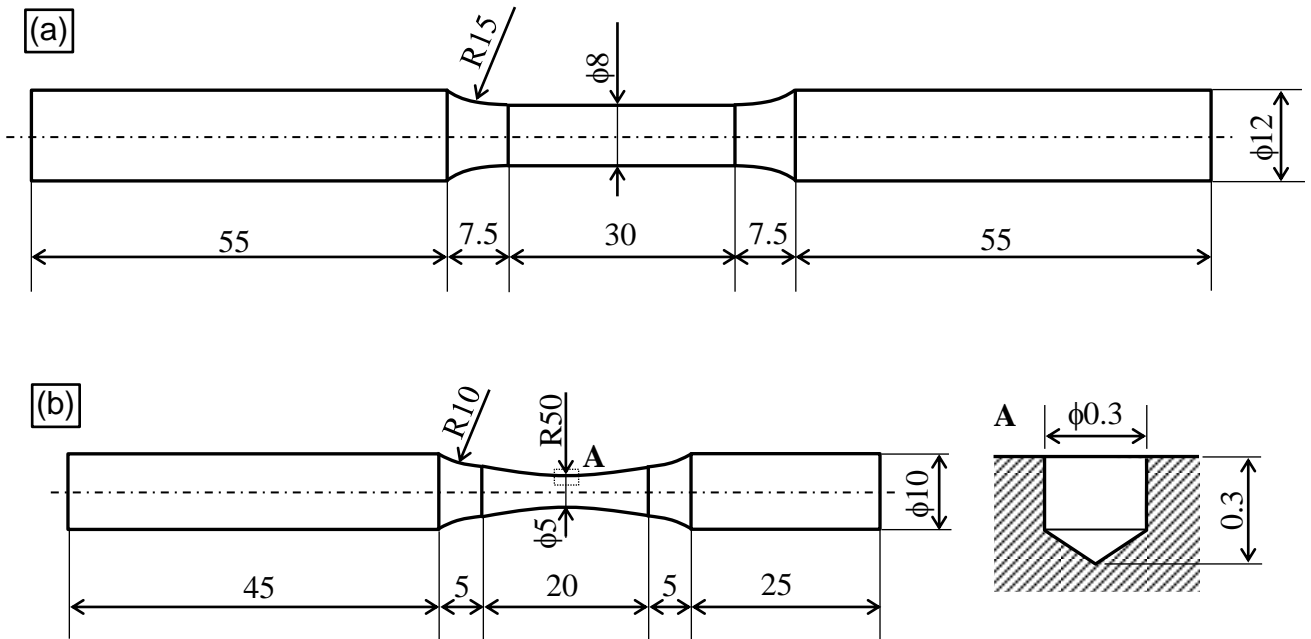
Shape and dimension of specimens (unit in mm): (a) for tensile tests; (b) for fatigue tests.
